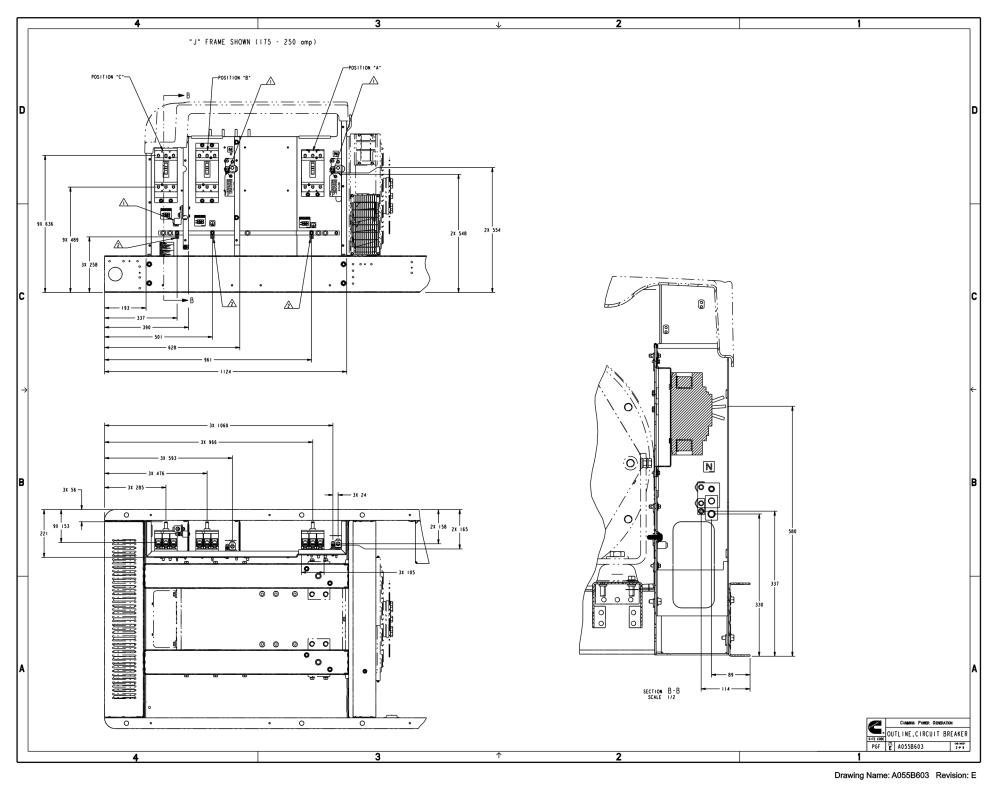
CIRCUIT BREAKER OUTLINE DRAWING (SHEET 2 OF 6)
